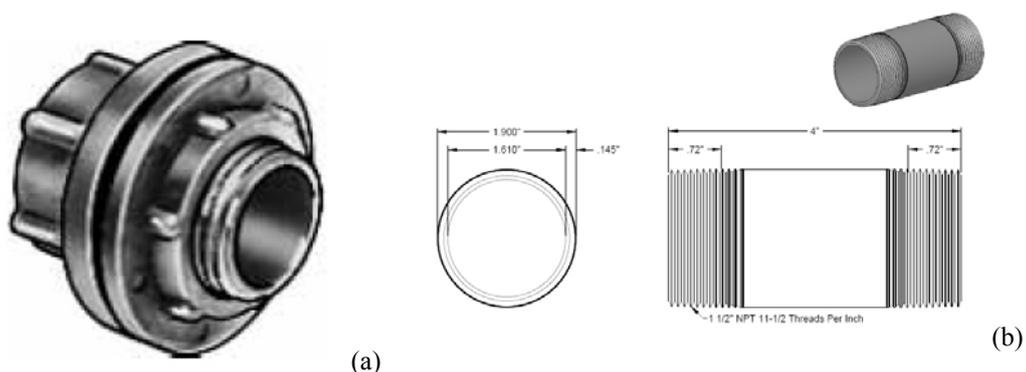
Conduit hub (a) and straight nipple (b) for pipe connection to module.
